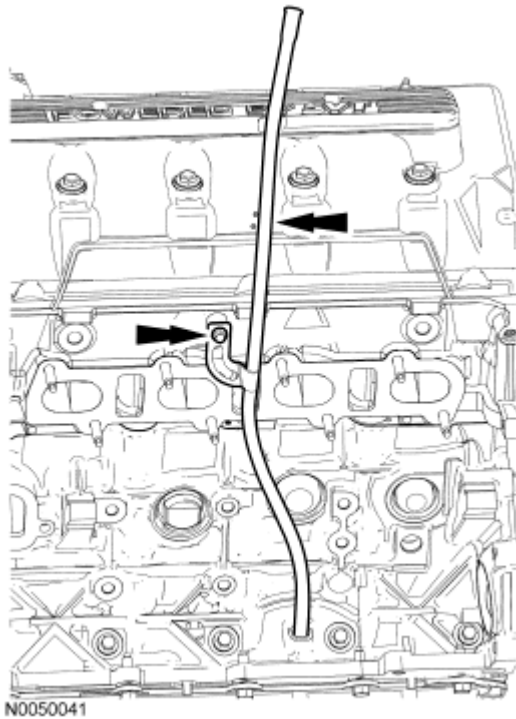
Identifying Oil Level Indicator Tube & Bolt
